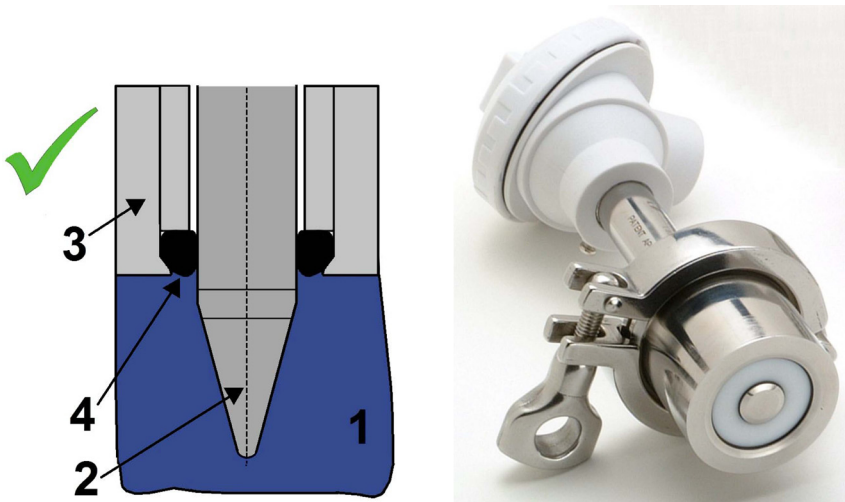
In the product area (1), a sensor (2) can be installed via a weld-in adapter (3) into and flush with the tank wall. The detachable seal joint (e.g., O-ring, 4) is almost completely enclosed with the surrounding metal protecting the non-product side from the product contact area (Lelieveld et al., 2003; Hauser et al., 2007) (photo, right, courtesy of Weed Instrument Co., Inc. d/b/a Ultra Electronics, Nuclear Sensors & Process Instrumentation).
